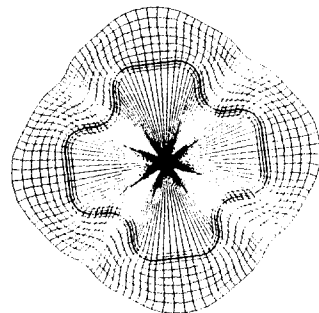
Calculated blank shape for deep drawing process ($H=24$ mm)
